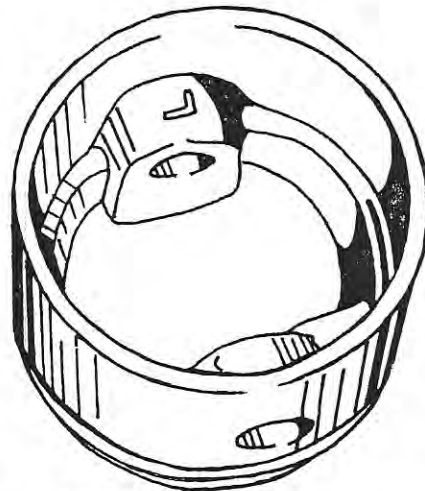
View of lower side of piston showing the "L" marking which indicates the "Loose" piston pin boss. See text for details.
